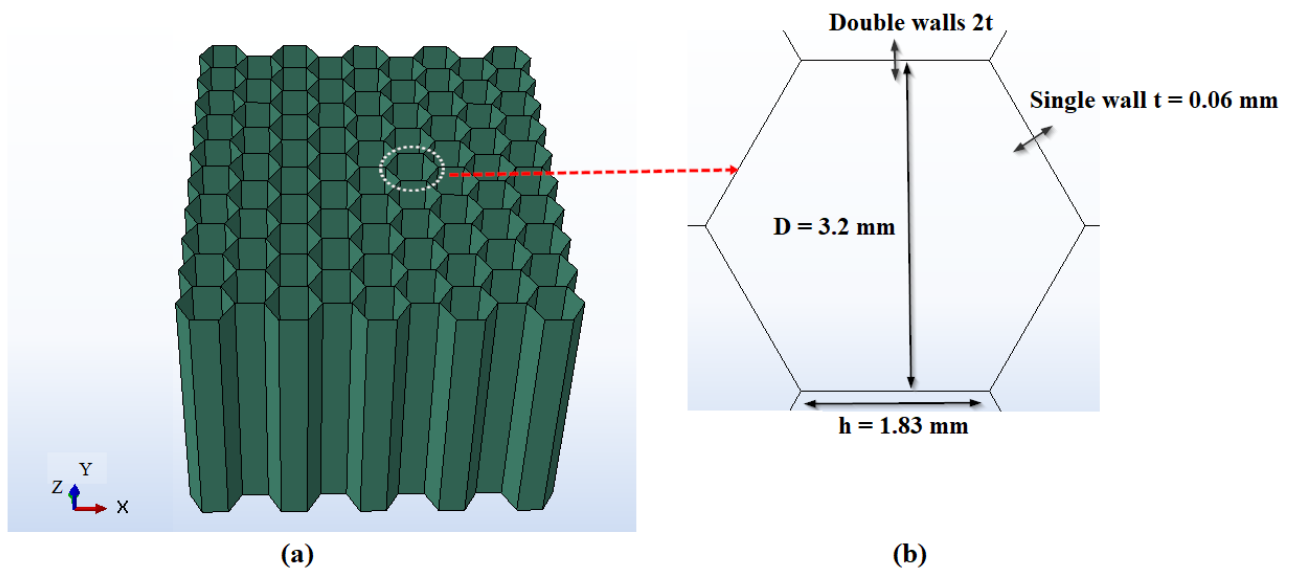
(a) Dimensions of the honeycomb structure; (b) dimensions of the hexagonal cell.
